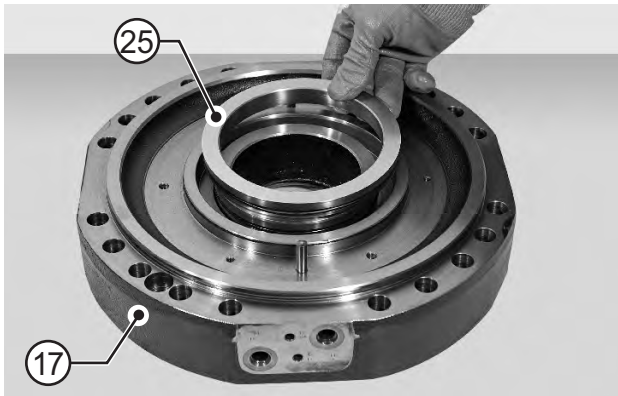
Lubricate the piston and the o-rings and install the unit (25) into the cylinder (17) .
